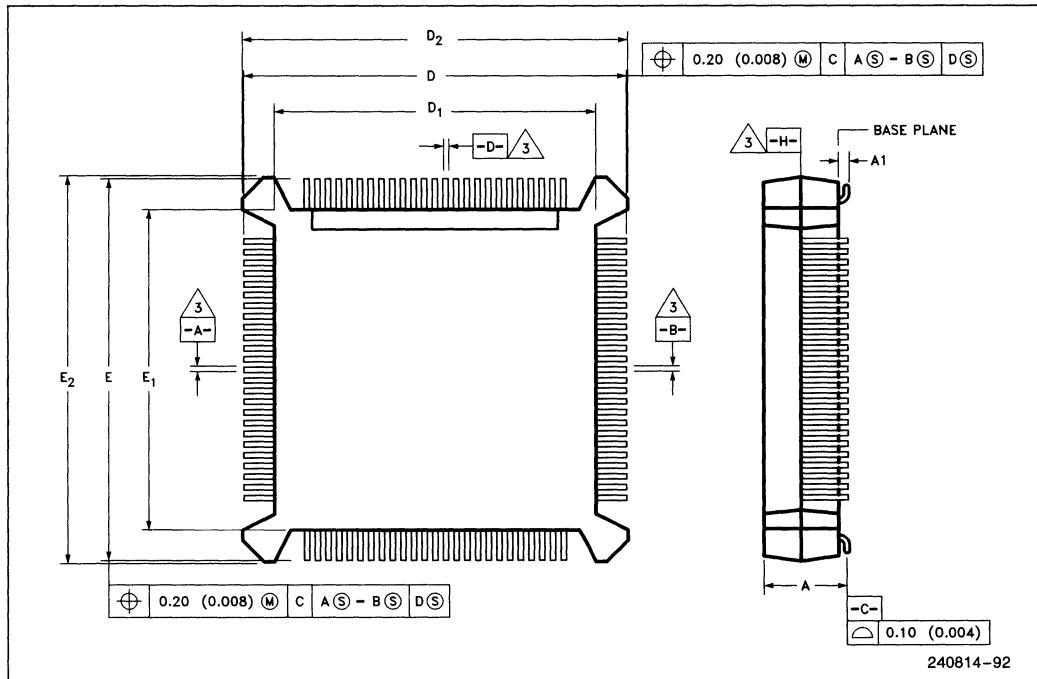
Principle Dimensions of the 82360SL I/O in the 196-Lead PQFP Package
